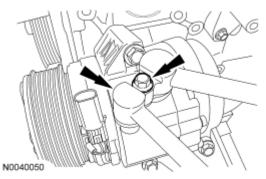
Locating A/C Manifold And Bolt Courtesy of FORD MOTOR CO.
